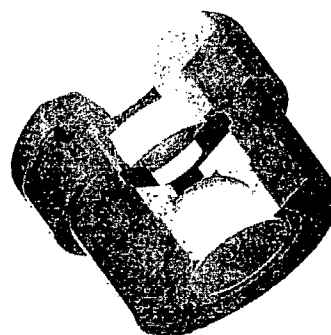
FIXED FOCUS EYEPiece ASSEMBLY
